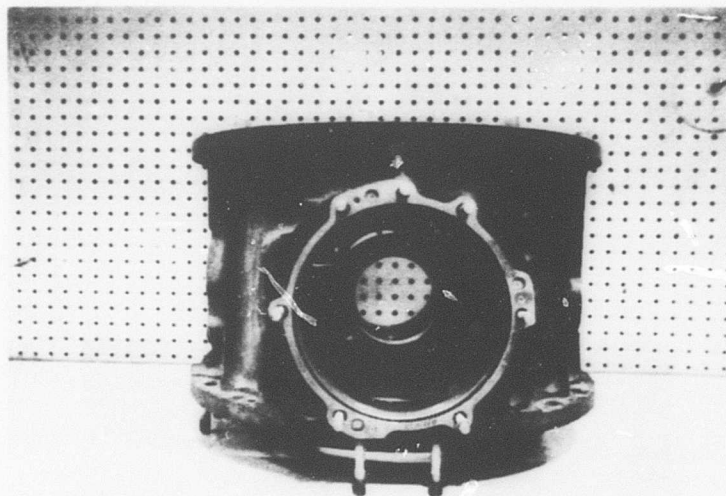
Input Quill Area of 204-040-353-23 Magnesium Housing.
